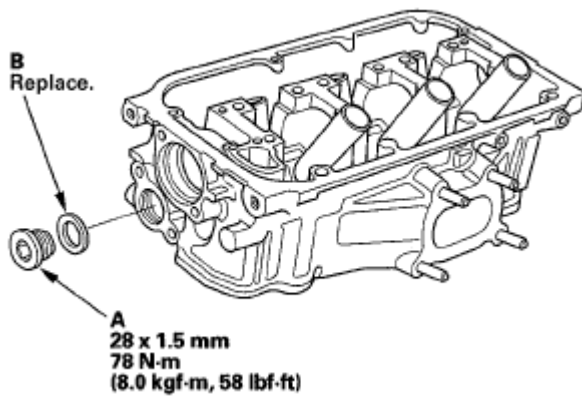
Identifying Sealing Bolt With Torque Specification - Front
